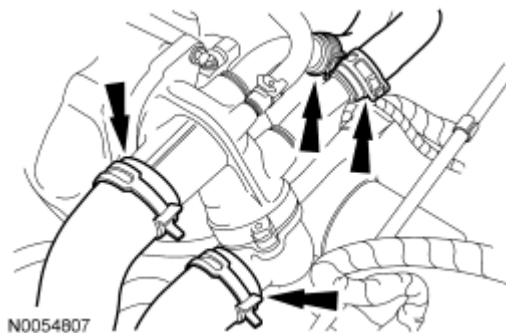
Locating Upper Radiator Hose, Lower Radiator Hose & Heater Hoses From Thermostat Housing
